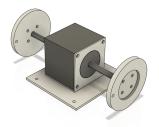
Stepper Motor Mounting and Flange Coupling to Crank Disks
